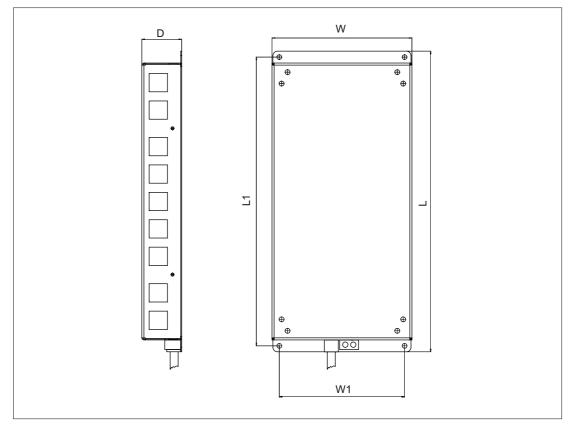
Dimension drawing of braking resistor, frame sizes FSA and FSB
